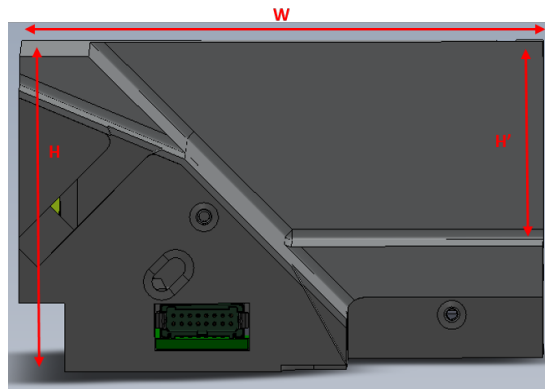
CubeCAT laser engine mechanical casing side view.
